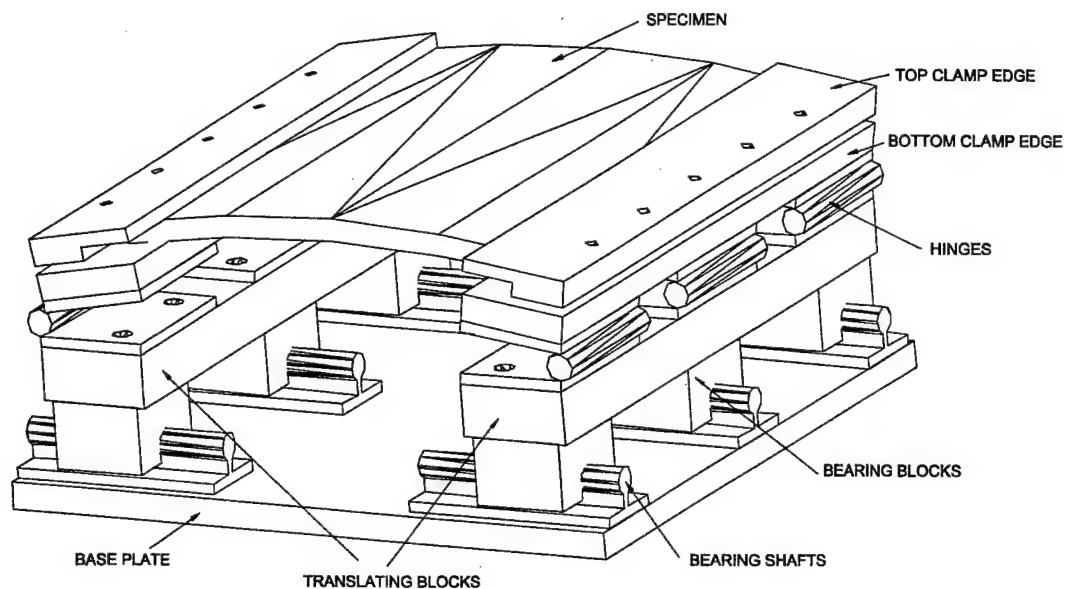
ILLUSTRATION OF THE TEST FIXTURE FOR CURVED PANELS
